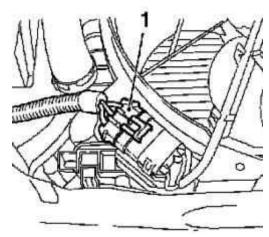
Wiring harness connector from the fan case fan: 1 - connector
